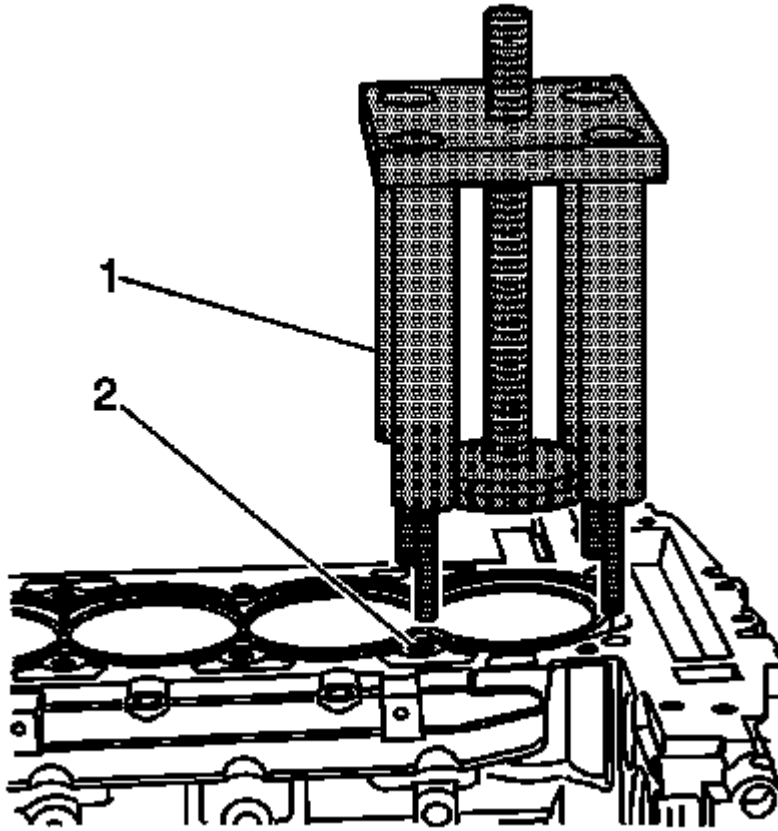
Identifying Cylinder Bore Sleeve Installer Assembly
